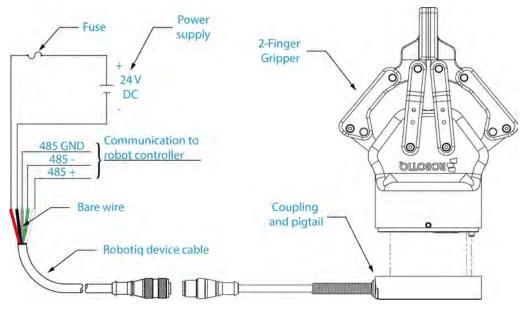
Robotiq 2-Finger with pigtail cable and device cable wiring schematic.
